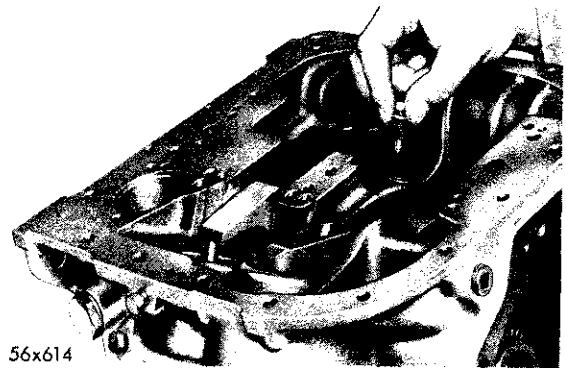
Removal and Installation of Intermediate Support Locating Screw
